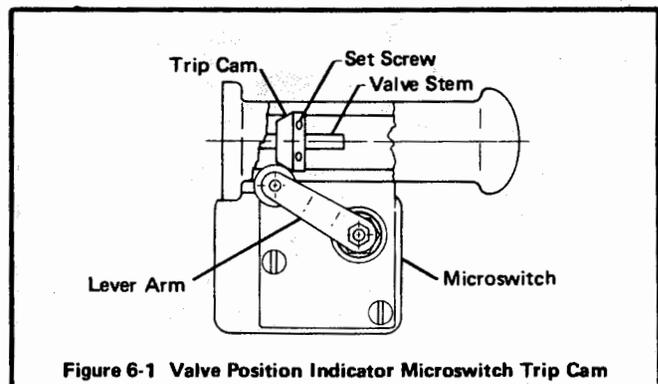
Valve Position Indicator Microswitch Trip Cam
